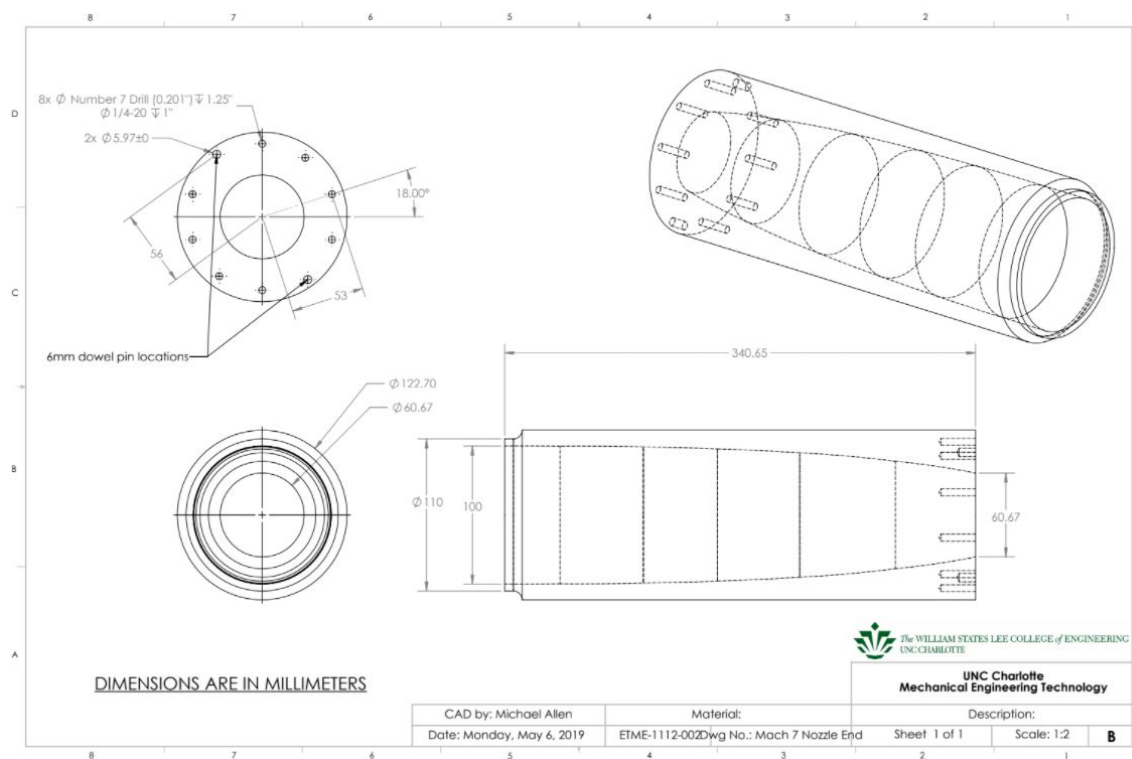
Drawing of the UNCC HSWT Mach 7 outlet.
